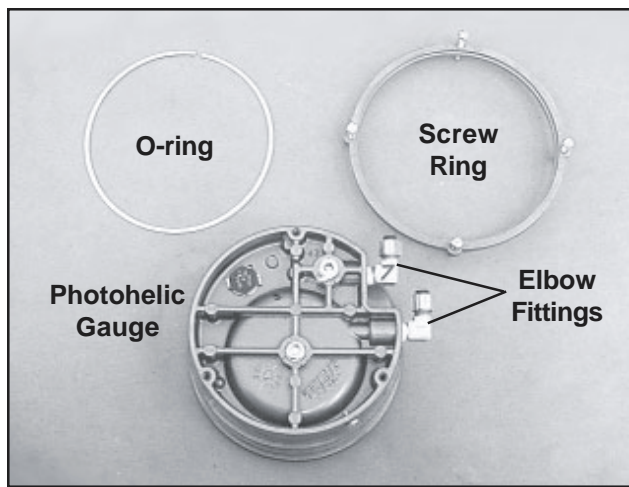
Photohelic Gauge, Mounting Components & Elbow Fittings
